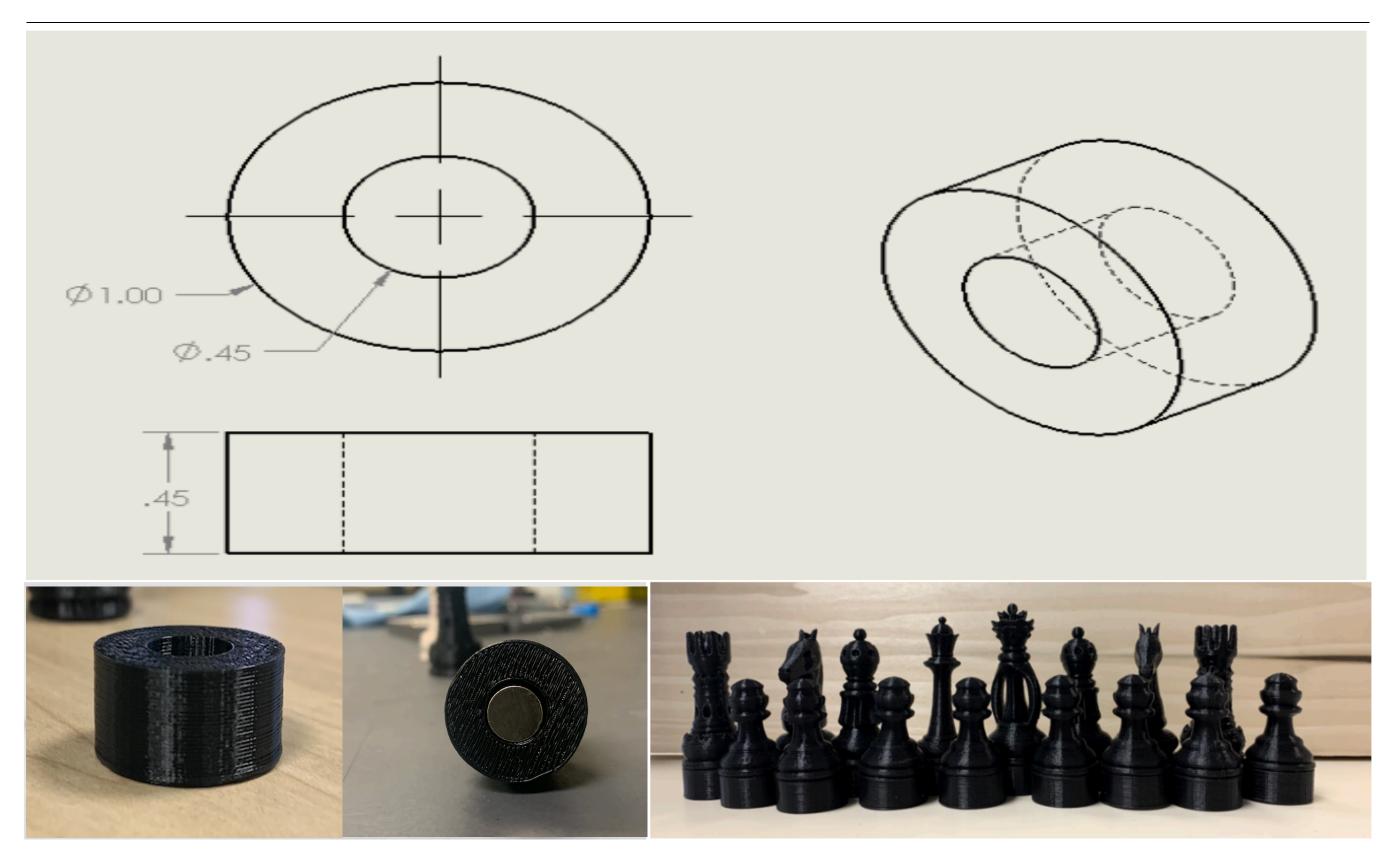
SolidWorks file of support piece - 3D Printed and glued to the base of the 3D printed chess pieces seen in the bottom of the figure. The disc was designed to allow for the insertion of 2 magnetic discs with dimensions shown.
